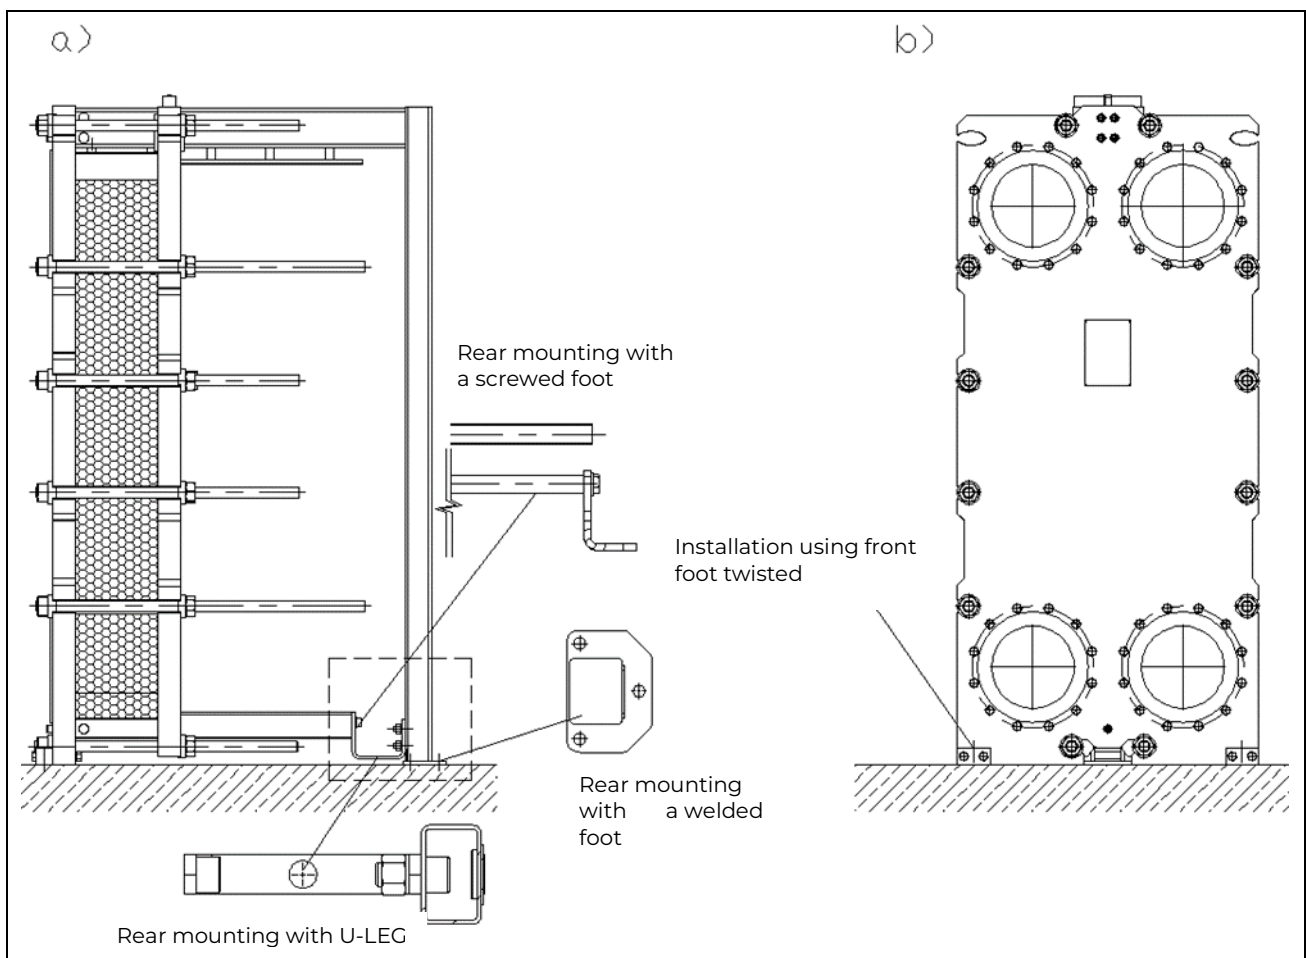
Plate exchanger mounting: a) back, b) front.
